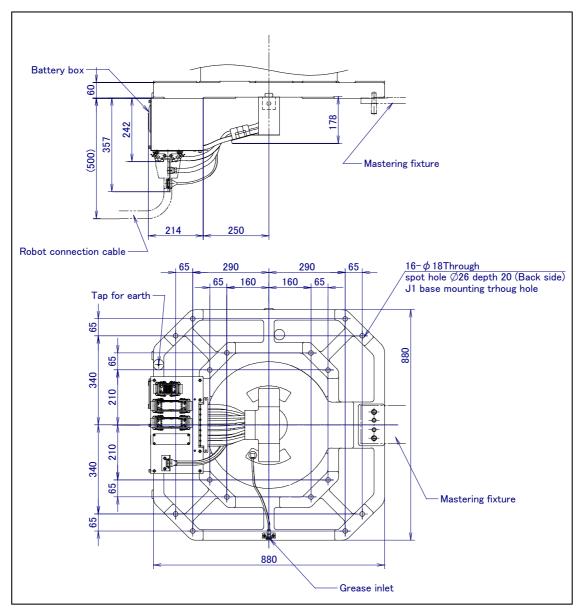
(e) Installation interface for the robot without a standard pedestal (Remote controller type)
